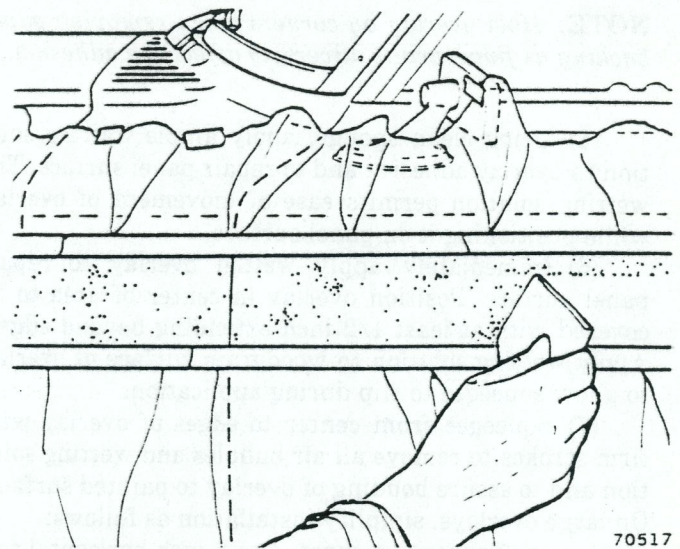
P-14 Using Squeegee to Remove Adhesive Residue
